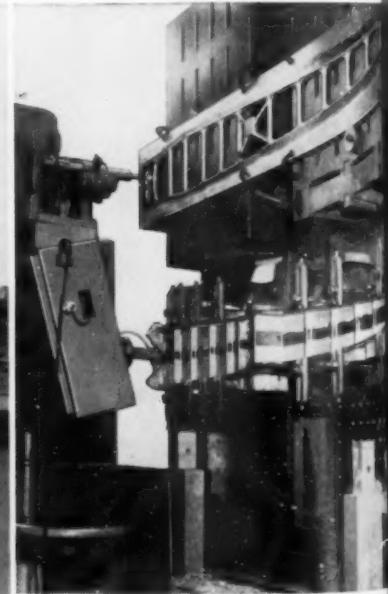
(PHOTO COURTESY ATOL'S TOOL AND MOLD CORPORATION, CHICAGO, ILLINOIS)
